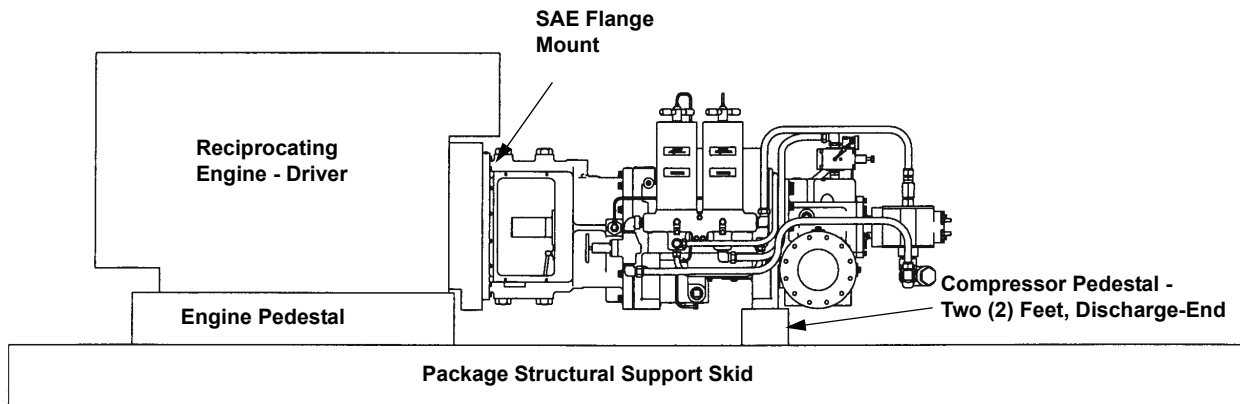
ENGINE/RGM COMPRESSOR ARRANGEMENT - TYPICAL FLANGE MOUNTED
